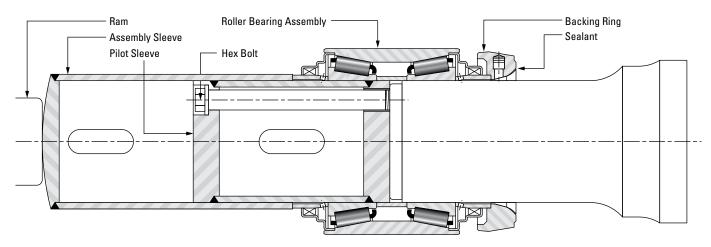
Separate sleeve method of applying roller bearings to a shaft
